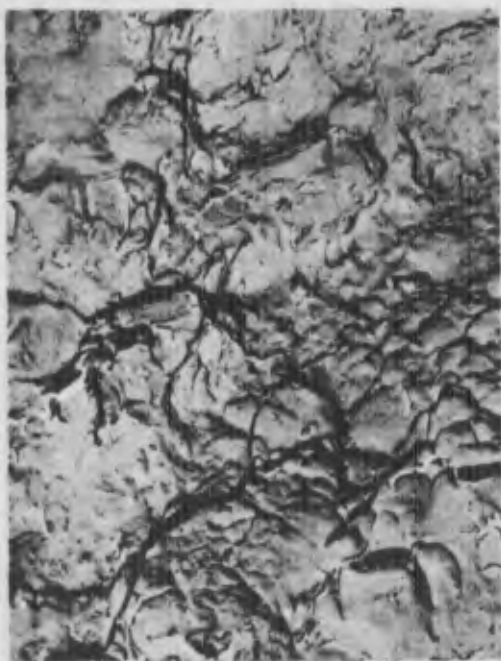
Fracture and Electron Fractographs of 300M Specimen D87A ,
